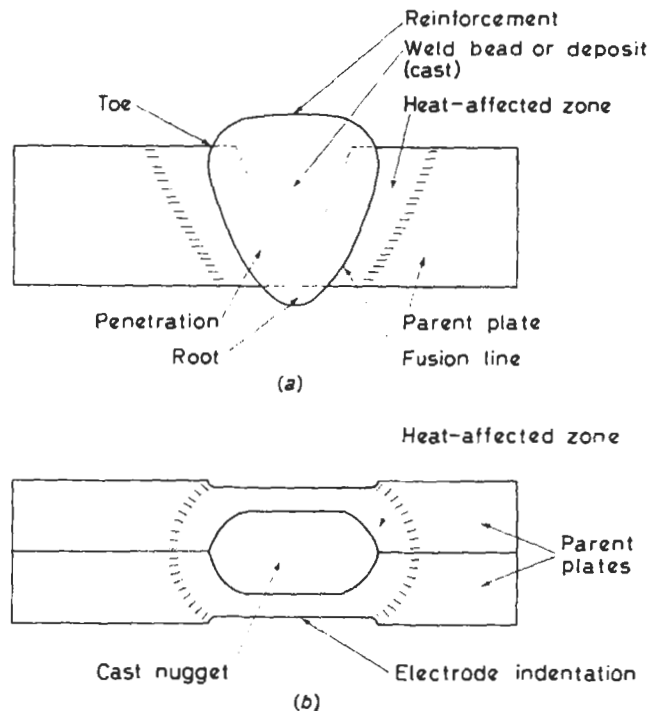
Weld definitions. (a) Fusion weld and (b) resistance spot weld
